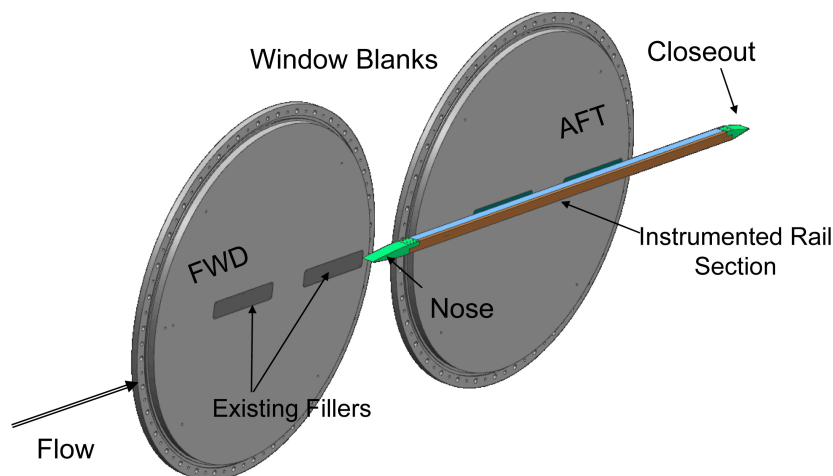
CAD view of 2” rail mounted on aft window blank of 9x7 wind tunnel
